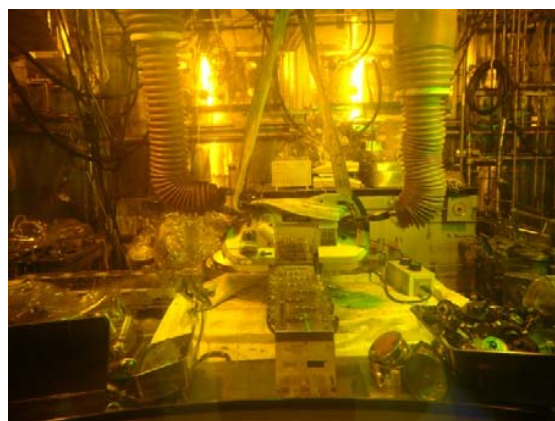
Sawing of the centrifugal contactor with the band saw machine
